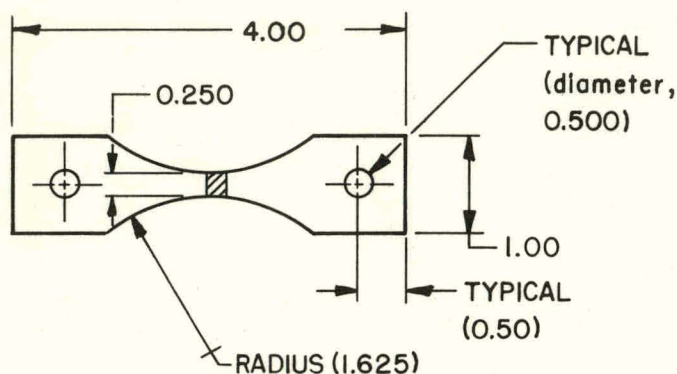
Tensile specimen design used to test electron-beam welds of ingot-sheet beryllium. The thickness of the bars can vary, but is usually 0.125 inches. The bars are neither etched nor annealed, after machining. (Dimensions as noted are in inches.)
